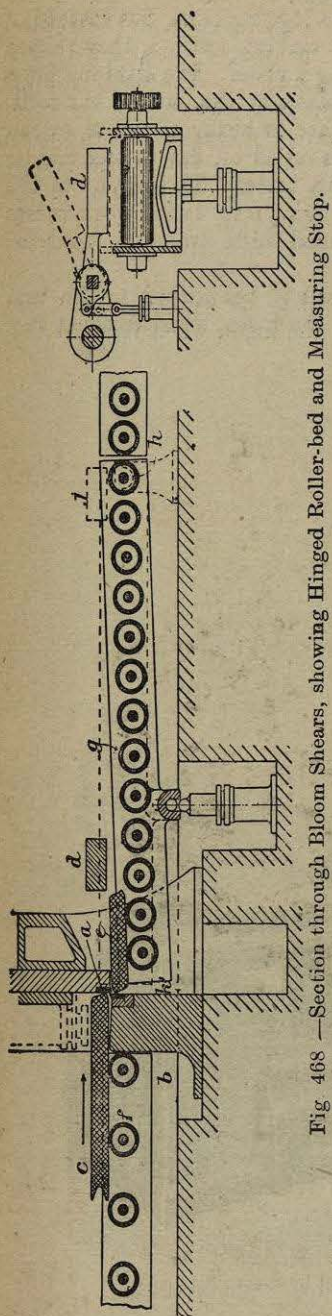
Section through Bloom Shears, showing Hinged Roller-bed and Measuring Stop.
